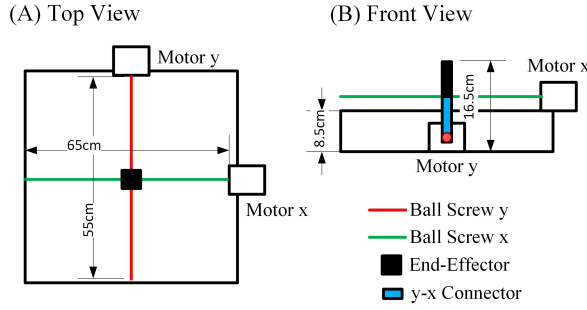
Mechanical design of GARD. (A) The top view illustrates the 65x55cm 2D workspace attained through the use of two rotary actuators and ball screws. (B) The front view showcases the y-axis actuator and ball screw, which can move both the end-effector and the x-axis actuator with the ball screw in the y-direction. The x-axis actuator moves the end-effector in the x-direction.
